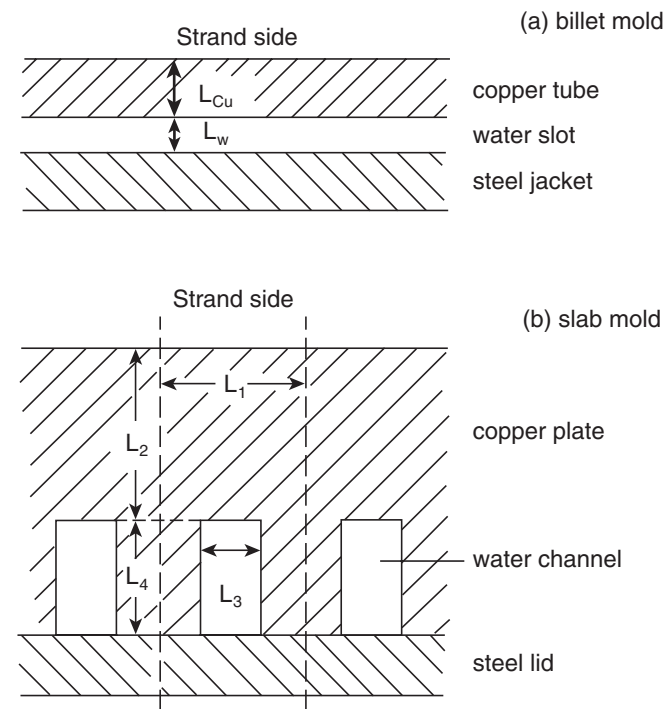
Water duct in continuous casting molds: (a) billet mold (tube mold); (b) slab mold.
